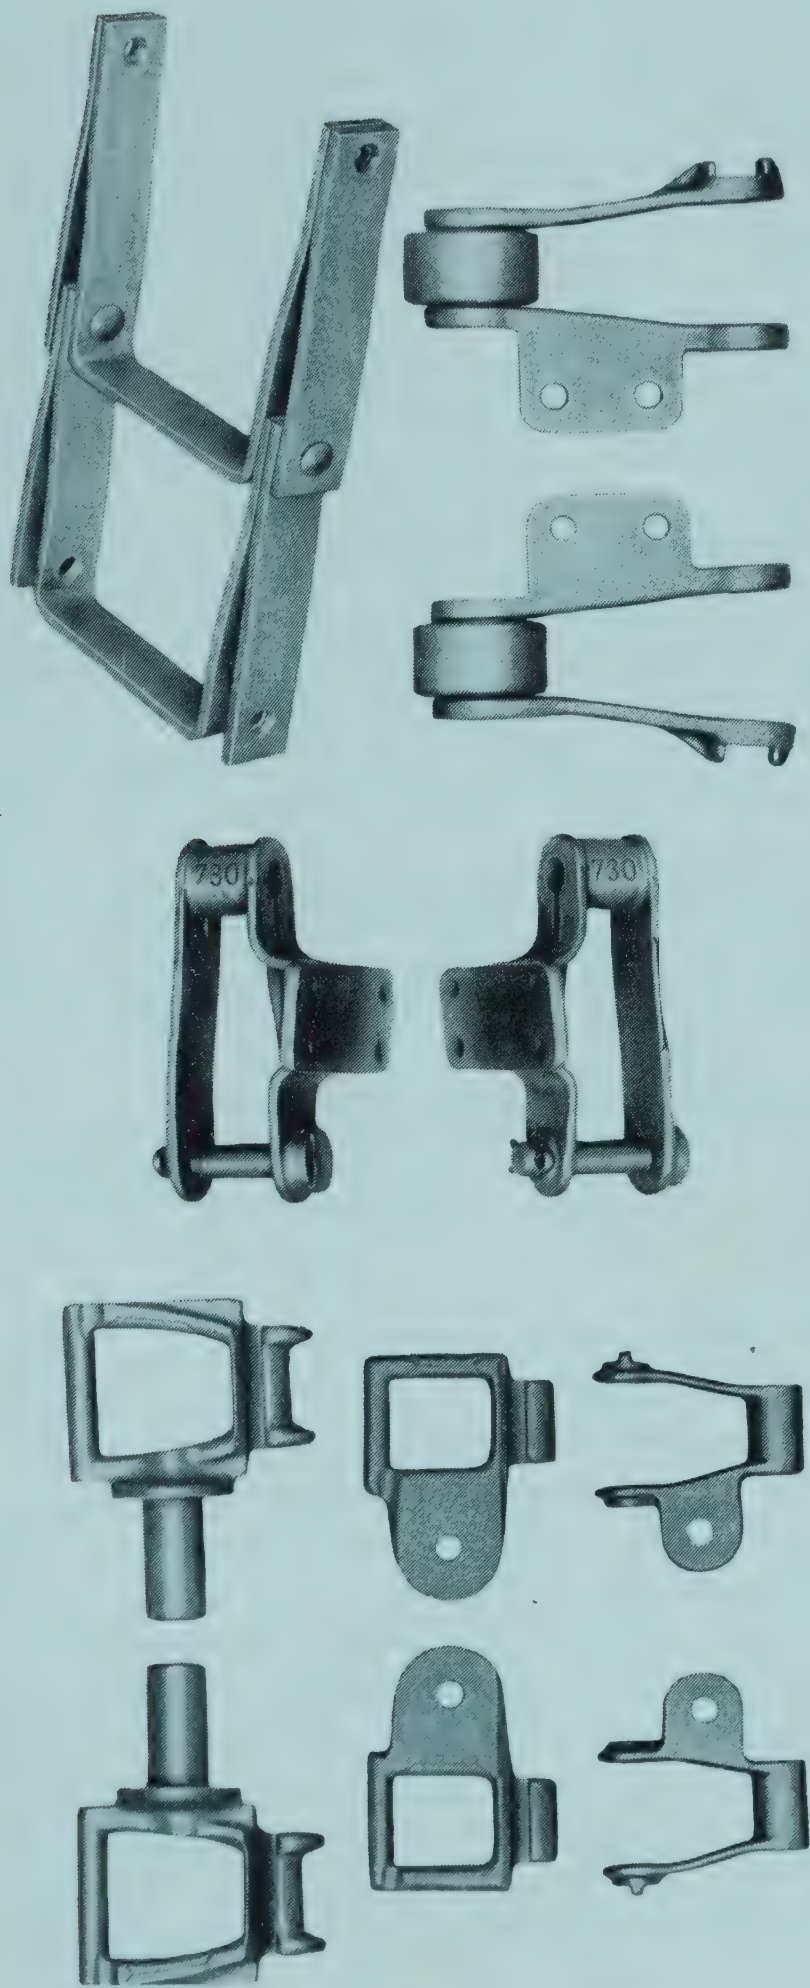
A few types of conveyor chains. (*Courtesy Link-Belt Co.*)
